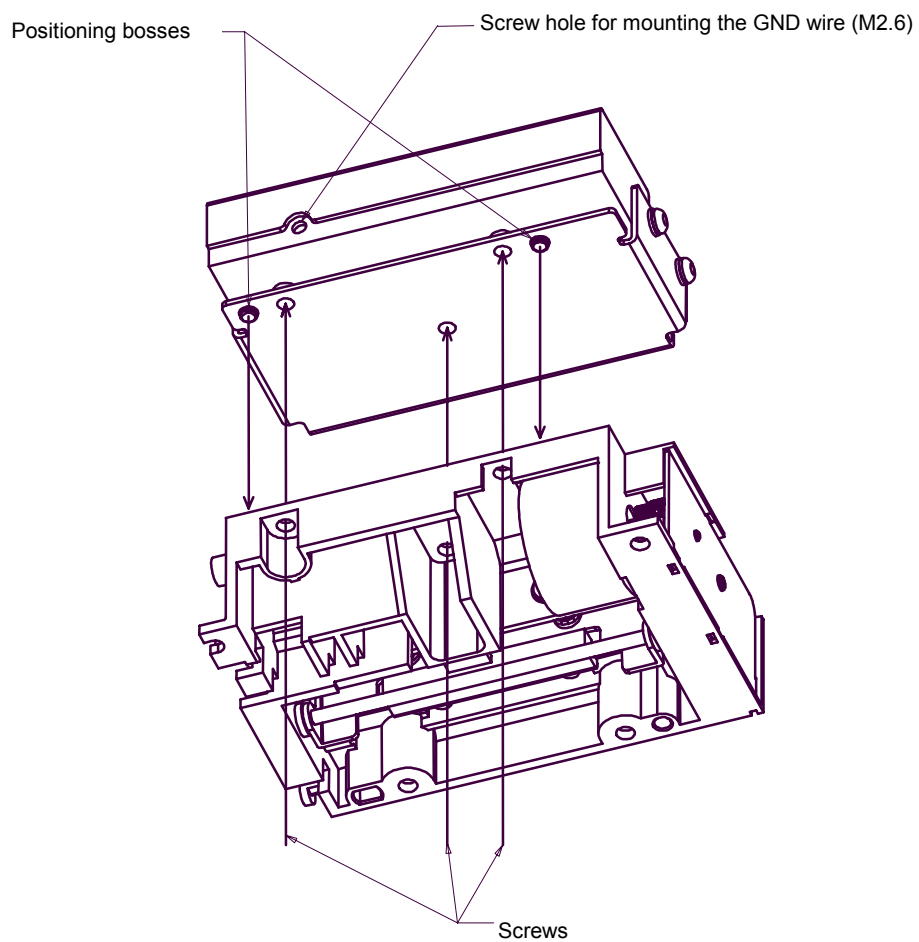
Installing the Autocutter Unit (Movable blade unit)
